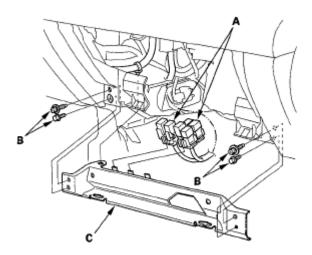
Identifying Relays, Bolts And Glove Box Frame
